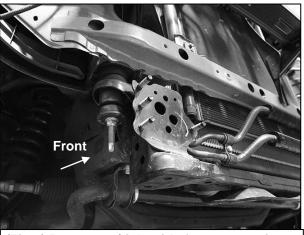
Remove clip attaching plastic cover to side of frame, (arrow), and remove cover
